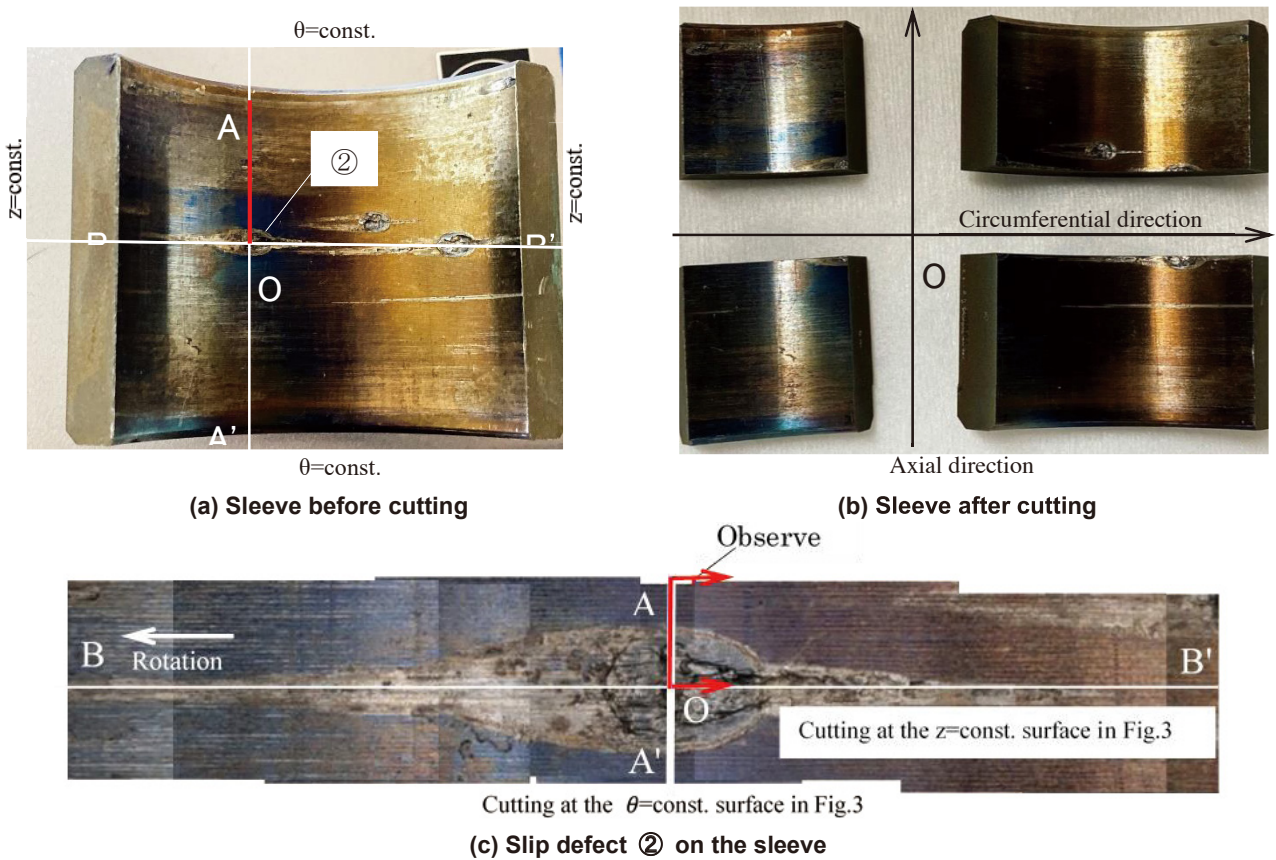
Slip defect ② on the sleeve to identify defect dimension
